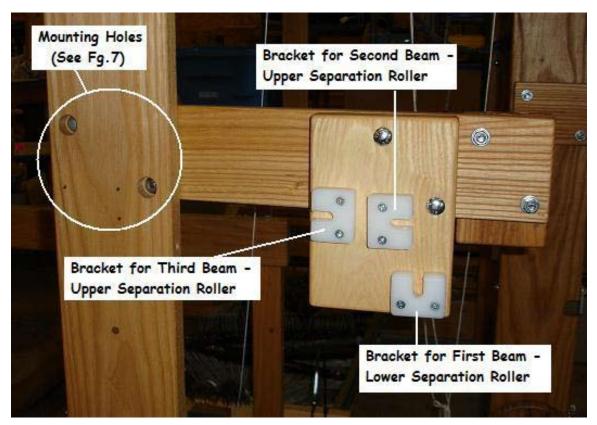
Location of Separation Roller Support Mount Holes and Brackets (interior view)
